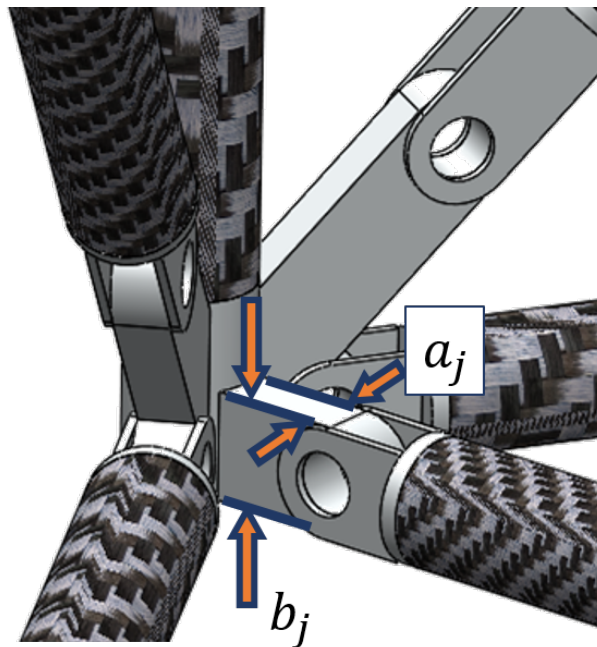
Illustration of a joint with rectangular cross-section in the ISTAR truss module.
